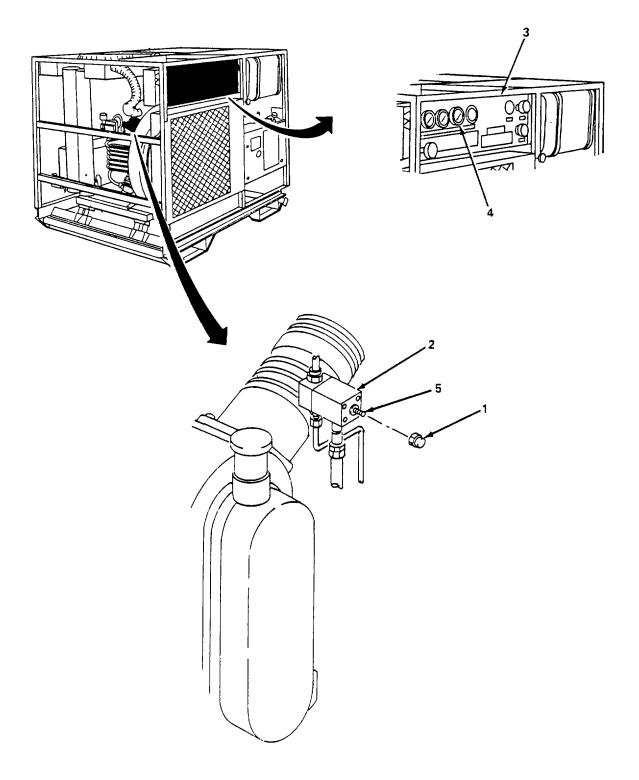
Oil Pressure Regulator Valve and Oil Return Line, Adjust.
